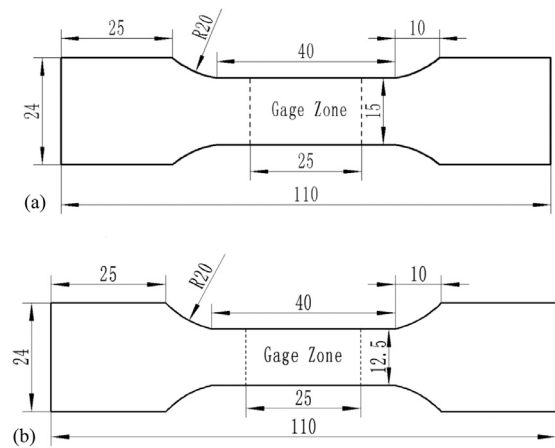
(a) Dimensions of Q195 and AL6061 tensile test specimen. (b) Dimensions of HSLA350 tensile test specimen.
